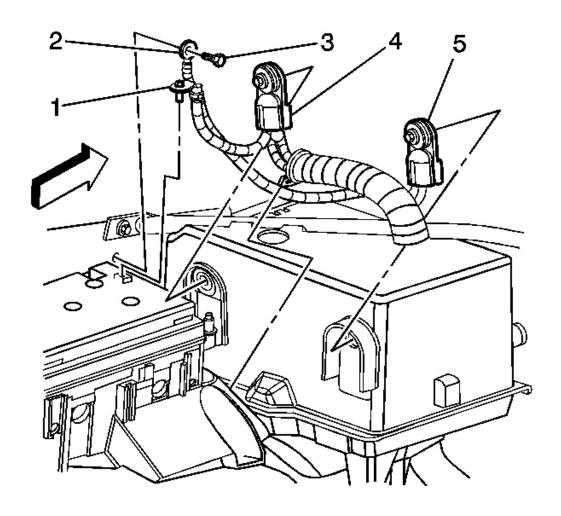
Identifying Battery Cable Components Courtesy of GENERAL MOTORS CORP.
